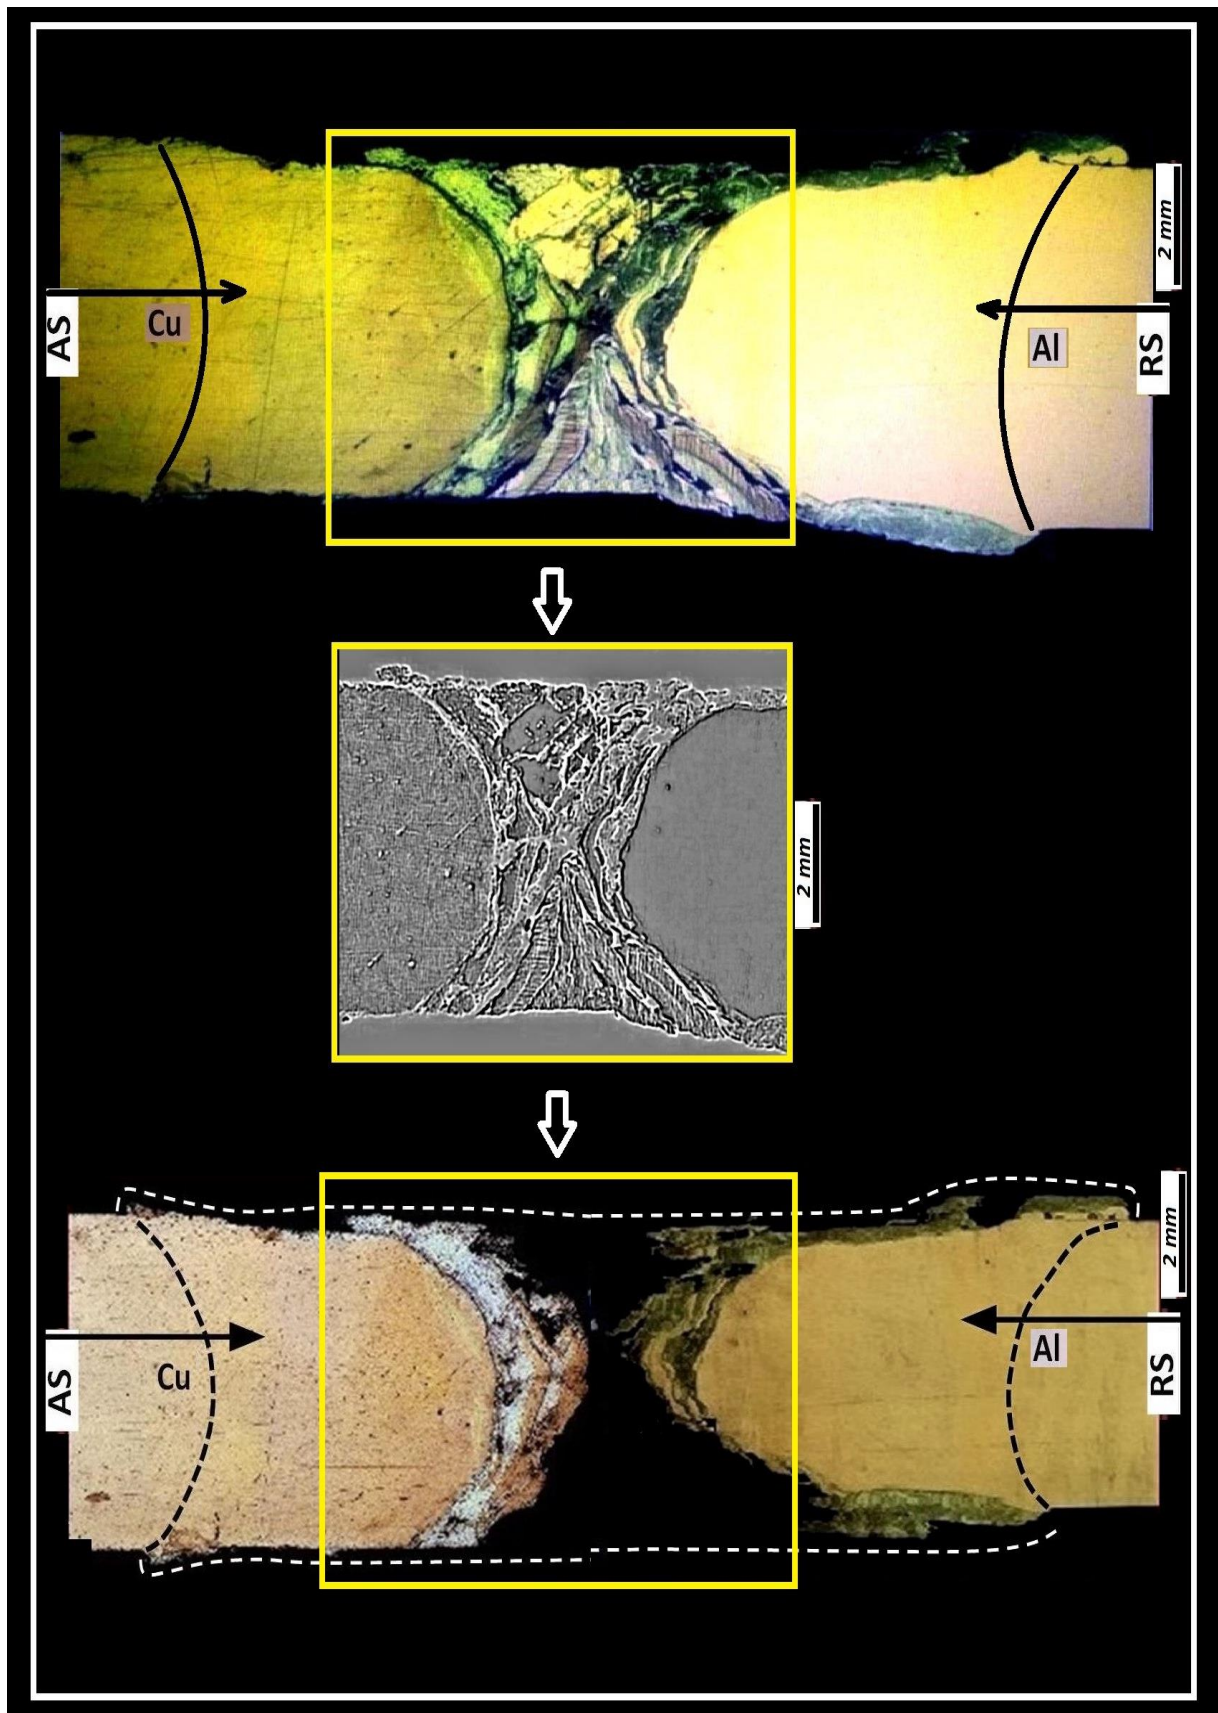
Cross-sections on the hybrid weld of Al-Cu BSW, representative of dissimilar flow interaction between the aluminium and copper mass layers; Cu-side (AS) and Al-side (RS).
